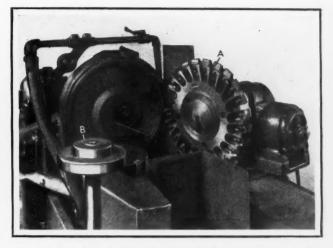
Grinding the Profile of the Blades of Large Circular Cutters Used for Roughing Straight Bevel Gears
